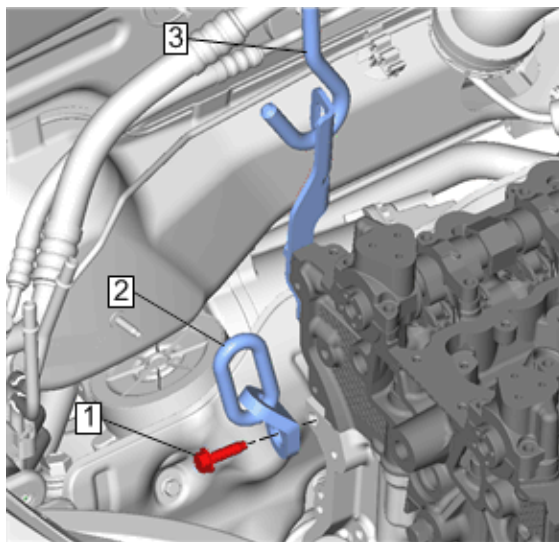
Engine Lift Bracket, Fixture Hook And Bolt
